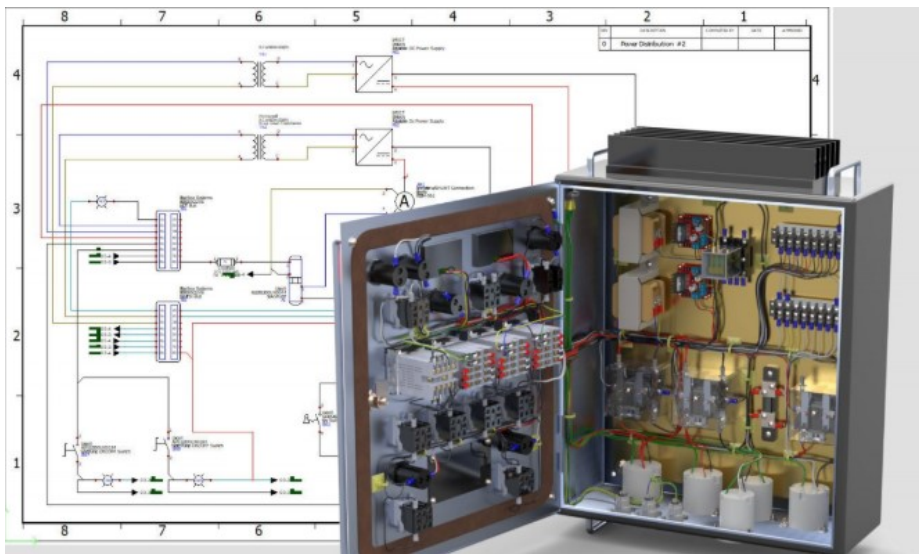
Product designed in ECAD (electrical design solution) and MCAD [21]
